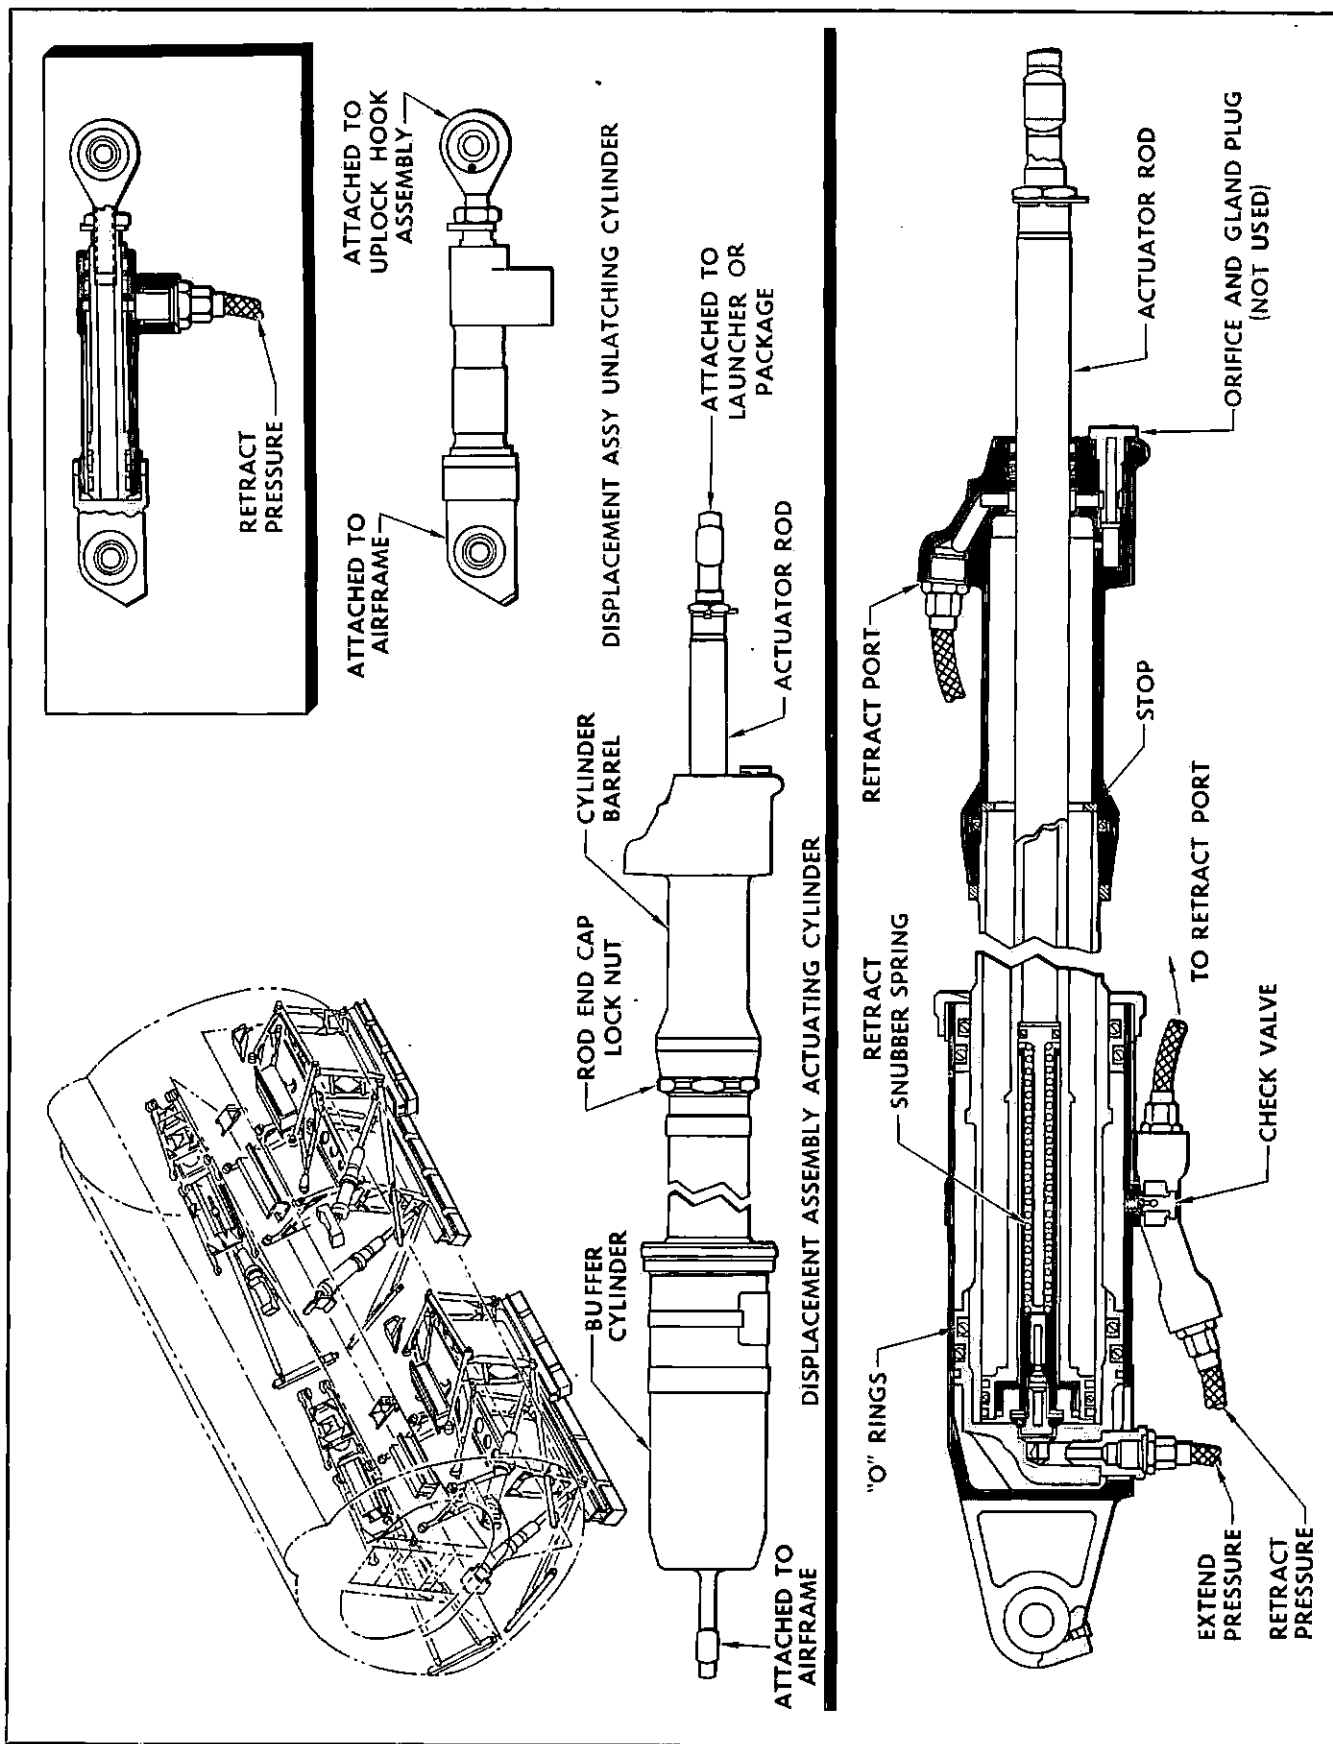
Launcher Assembly Unlock and Actuating Cylinder
